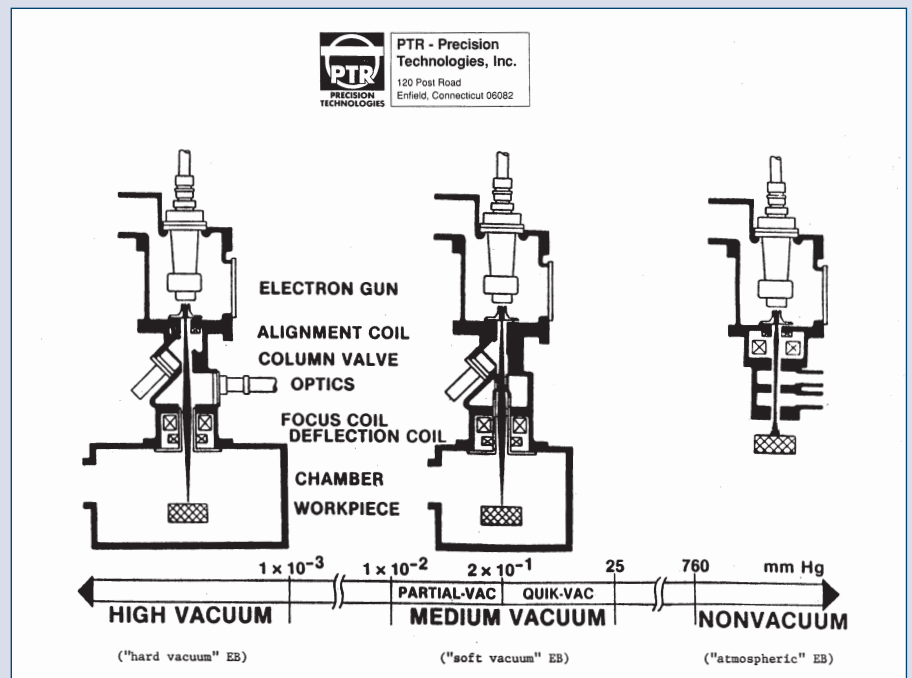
Various modes of operation in electron beam welding.
